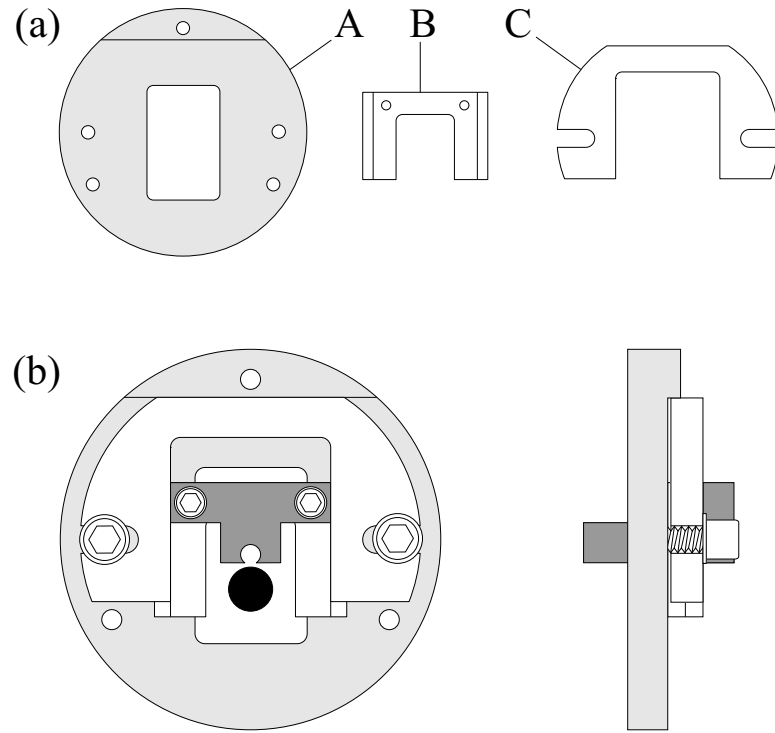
Position adjustment mechanism for the cantilever and optical fiber. (a) The three plates which make up the positioner. The cantilever holder (Figure 3.3) is bolted to plate B. Plate C is bolted to plate A with plate B sandwiched between. (b) The assembled positioner. The position of the rf coaxial cable is indicated by a black circle.
